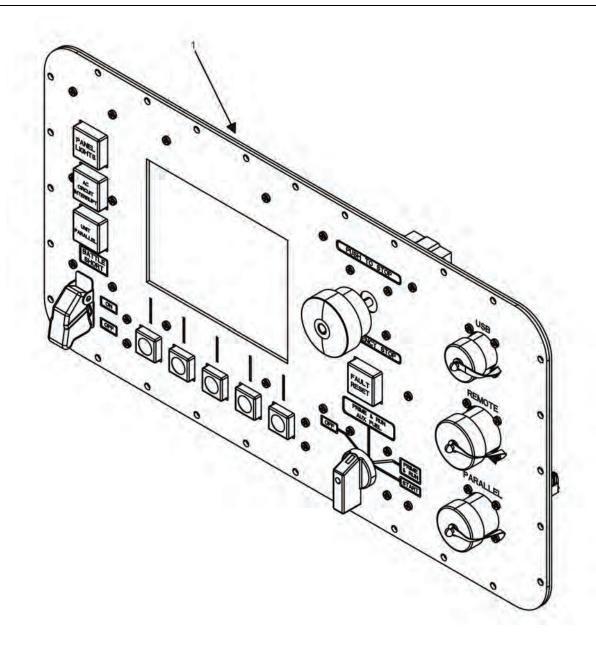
DCS Control Panel Assembly (Sheet 1 of 6).
